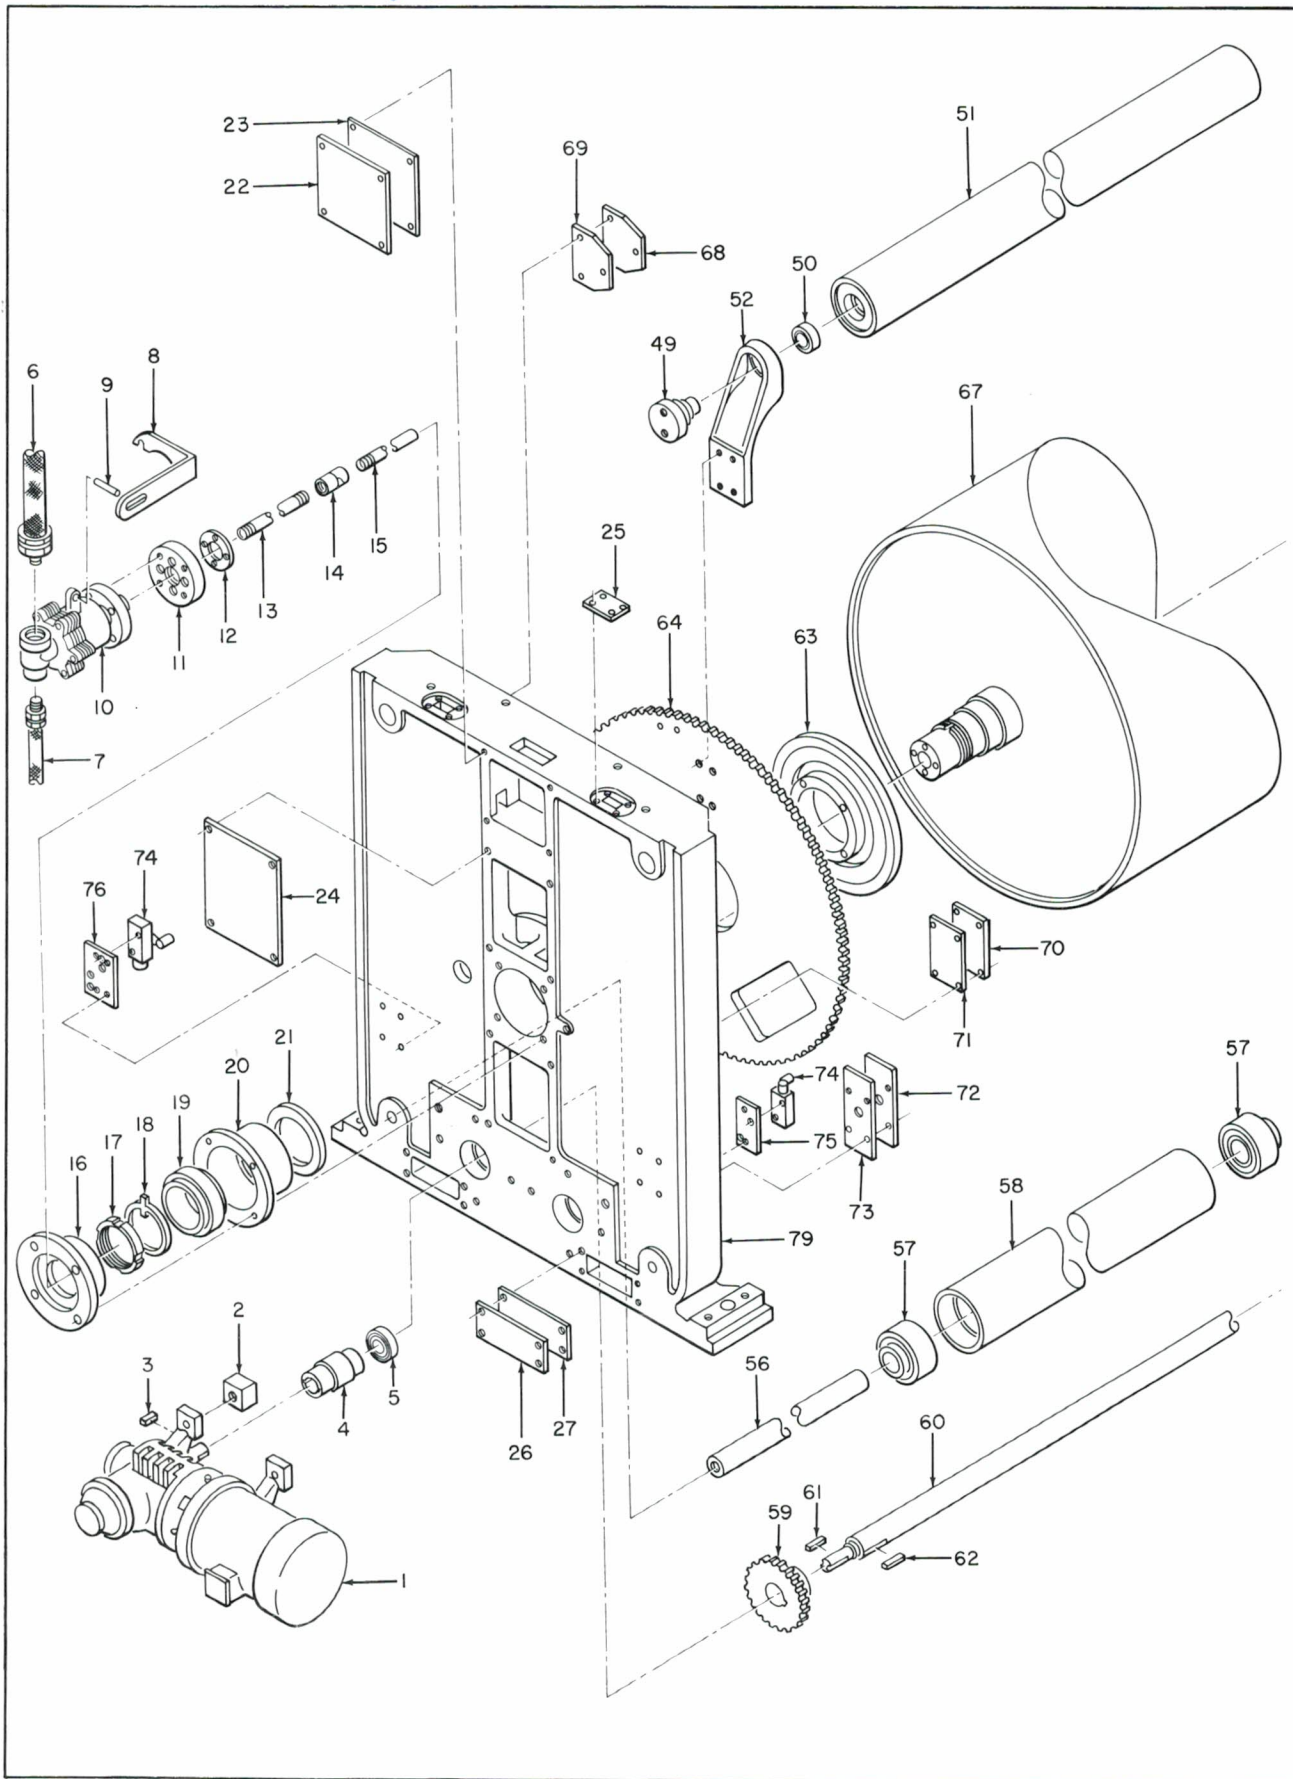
Frame and Drum Assembly, Upper and Lower (Sheet 1 of 2)
